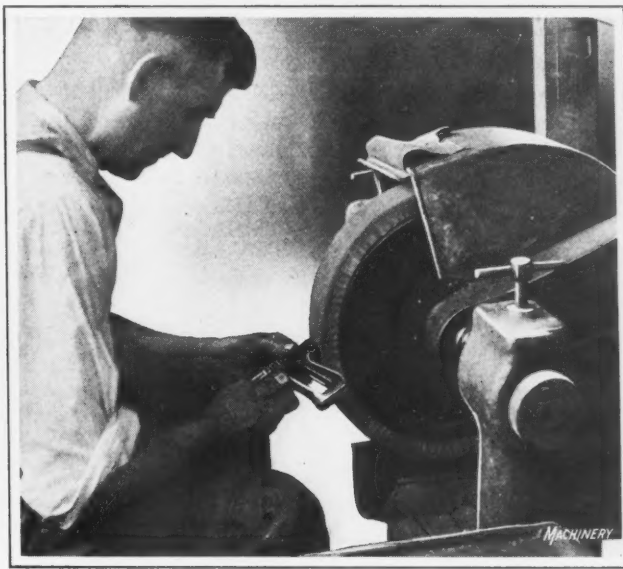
Blending Adjacent Curved Surfaces of Pistol Frame and Breech Plug after assembling
